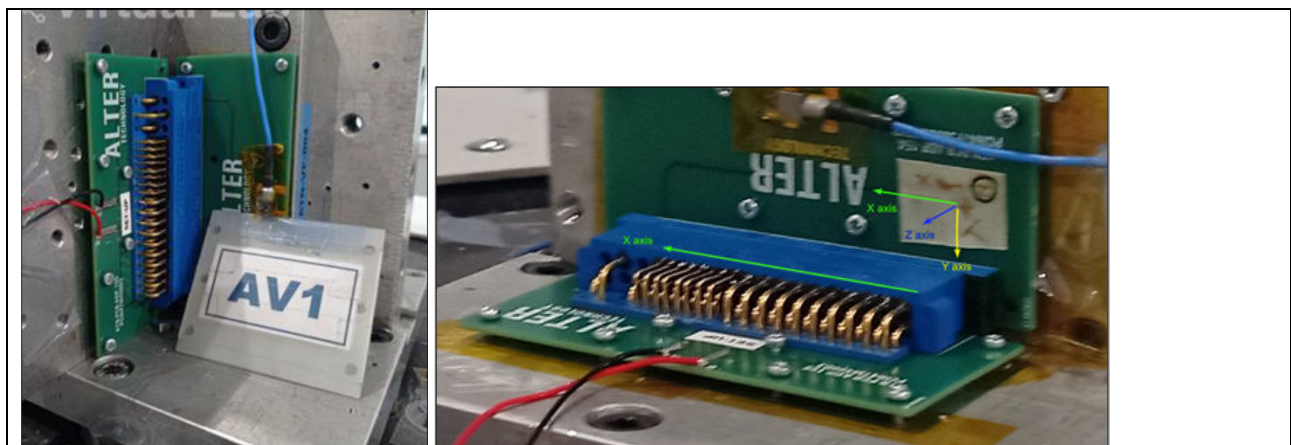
External Visual Inspection (EVI) after Mechanical Shock test
